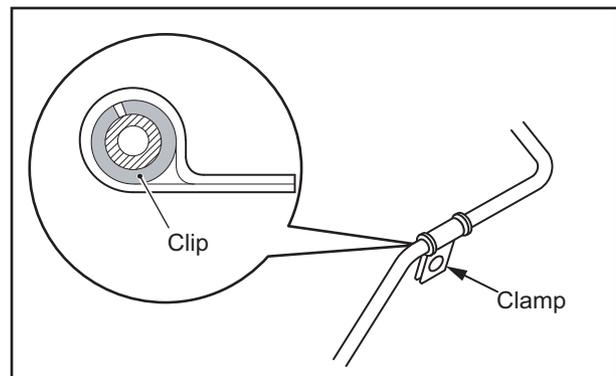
Oil pipe and Clip - Inspect and Replace
